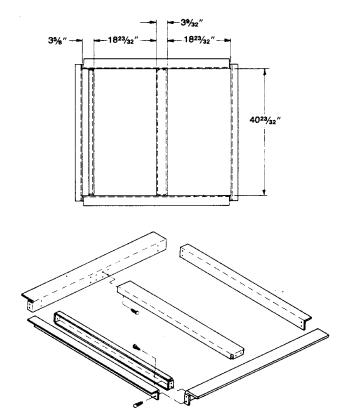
CANTILEVER CURB DUCT CONNECTION ACCESSORY
